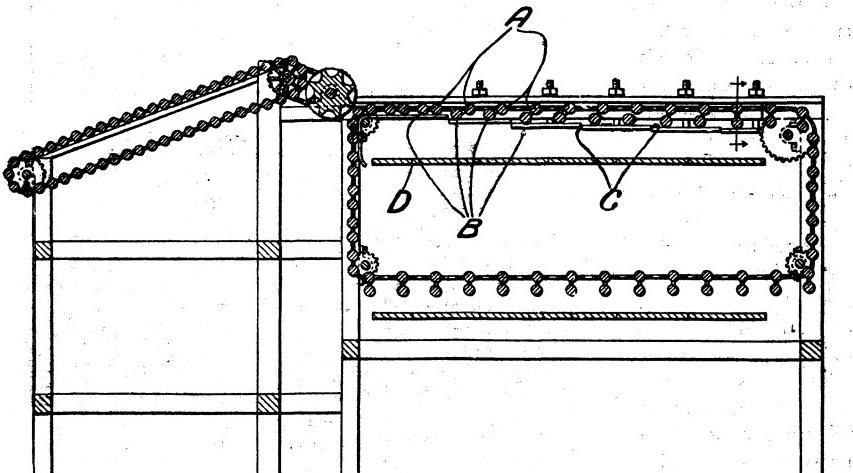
In this type of machine the sizing mechanism consists of rollers operating in pairs. In this sectional view A and B are the sizing rollers; C marks the steps that permit enlarging the openings; and D, the distributing belt.
